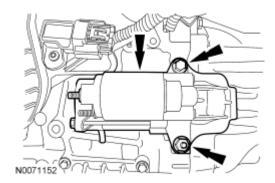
Locating Stud Bolt, Starter And Bolt Courtesy of FORD MOTOR CO.
